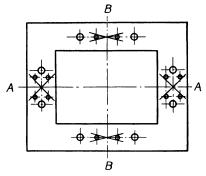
Marking-out of longitudinal and transverse centre lines of the motor on the bed plate
